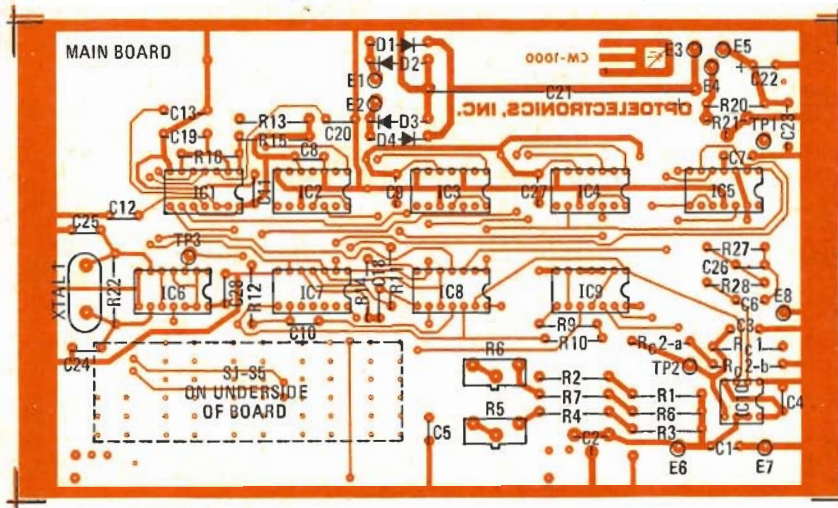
COMPONENT LAYOUT for the main board. Trimmer capacitor C2 is mounted on underside of board. See text on R₁ and R₂.
